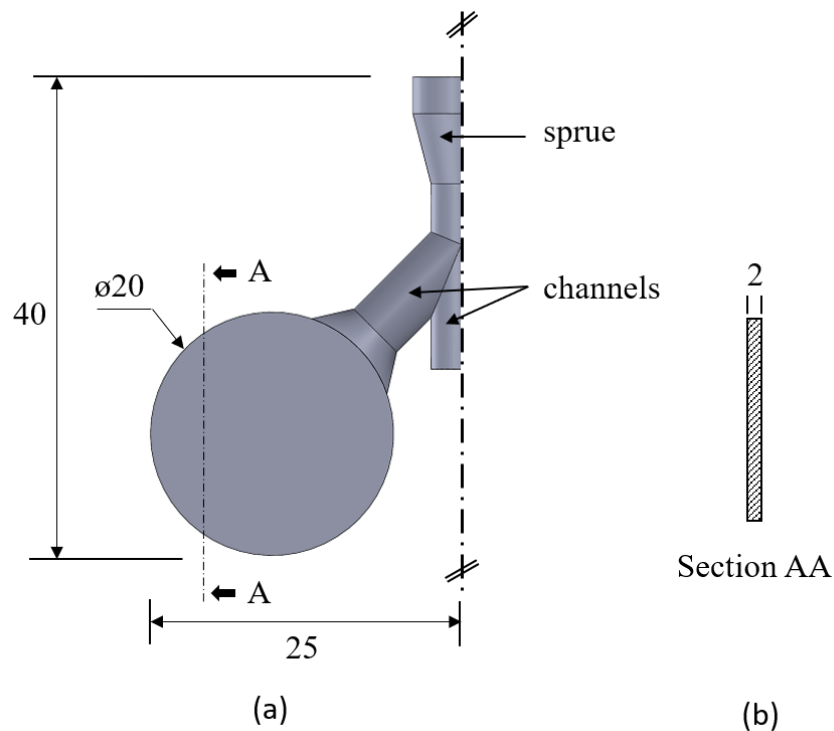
Models geometry (dimensions in mm): (a) tree assembly and (b) analyzed sectioned part.
